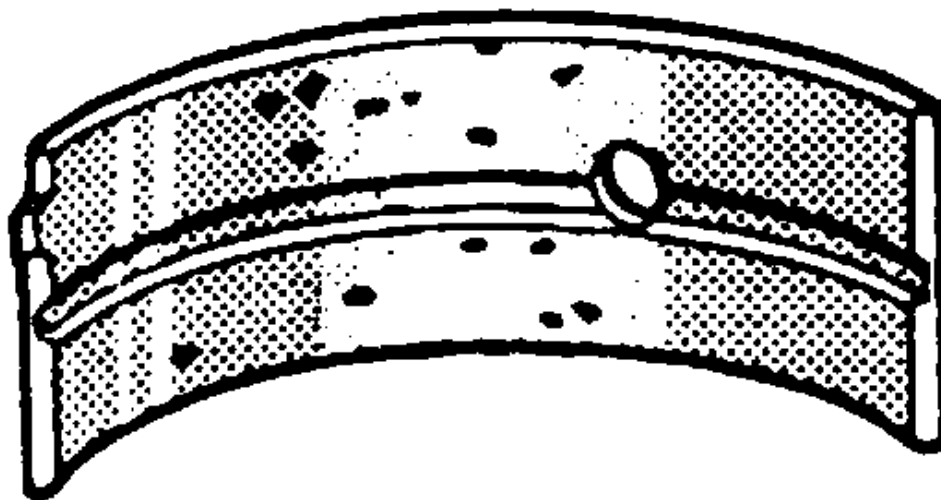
Identifying Crankshaft Bearing Craters Or Pockets
